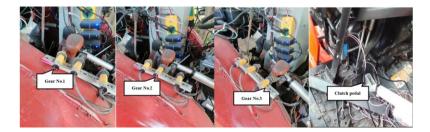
Installation and test operation of the gearshift position sensor on a real tractor
